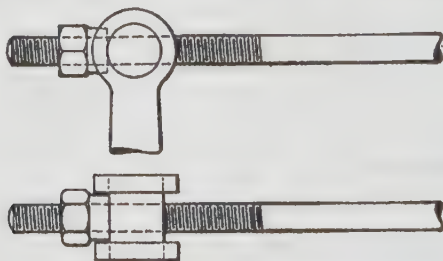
SCREW ADJUSTMENT FOR BRAKE ROD.
